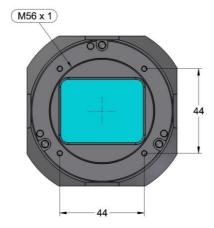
C1× camera head with a tiltable adapter base with M56×1 inner thread and four M3 threaded holes front view
